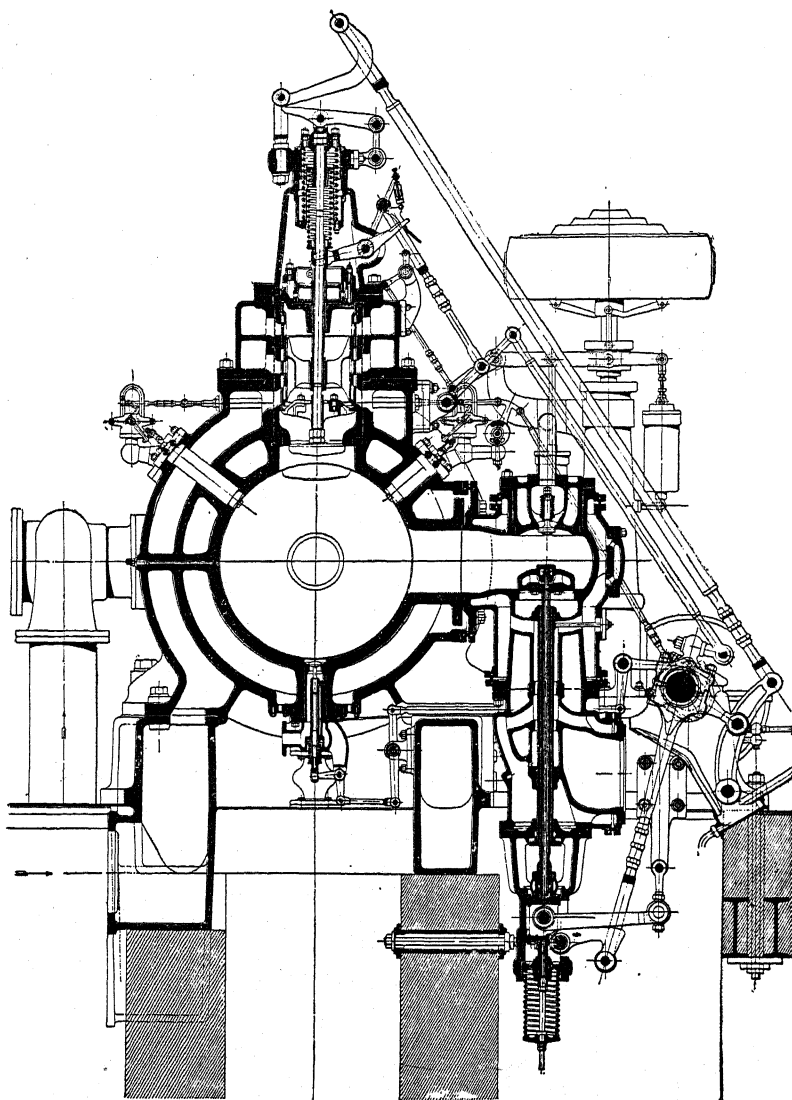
INLET AND OUTLET REGULATION WITH SIDE OUTLET-VALVE OF SCHÜCHTERMANN & KREMER, DORTMUND.
